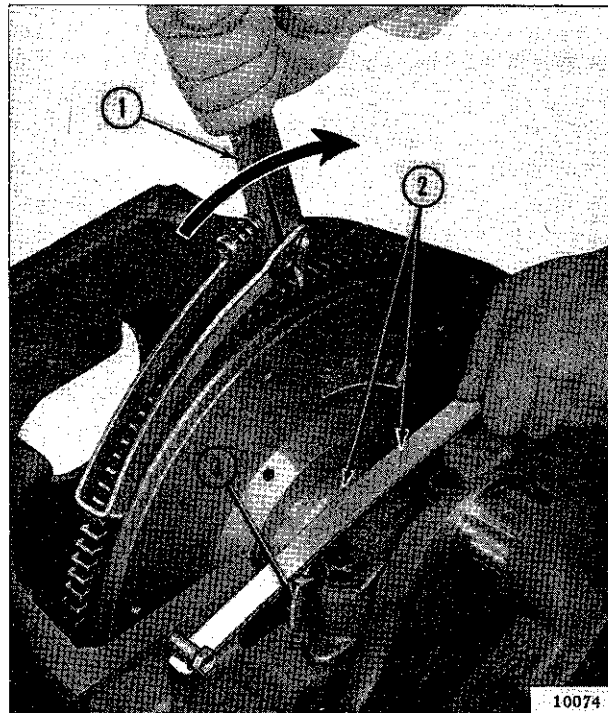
REMOVING REAR FILLER BLOCK GUARD
